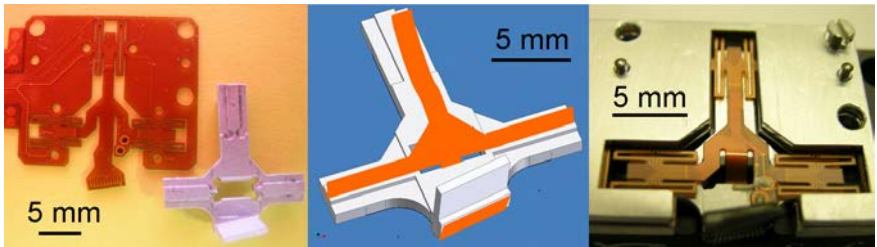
Left) Top view of the new flexprint sheet and platform prior to mounting. Center) Schematic illustration of the areas of the flexprint which were glued to the platform. Right) An open scanner showing the platform and the flexprint.
